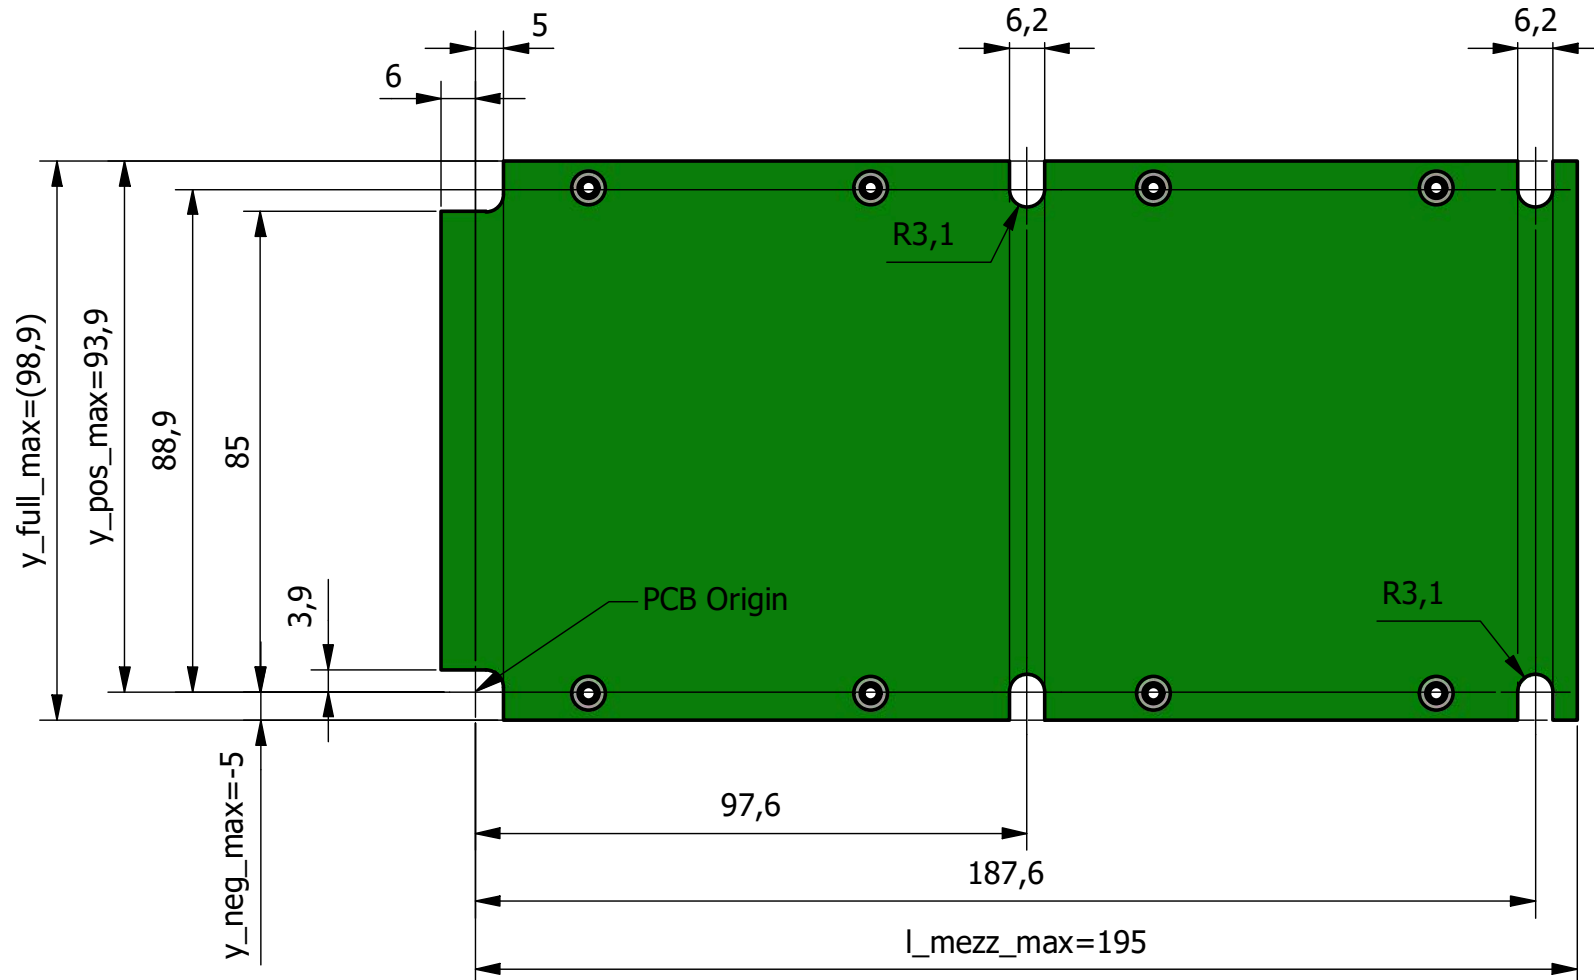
Reference mezzanine outline showing the maximum PCB size.
